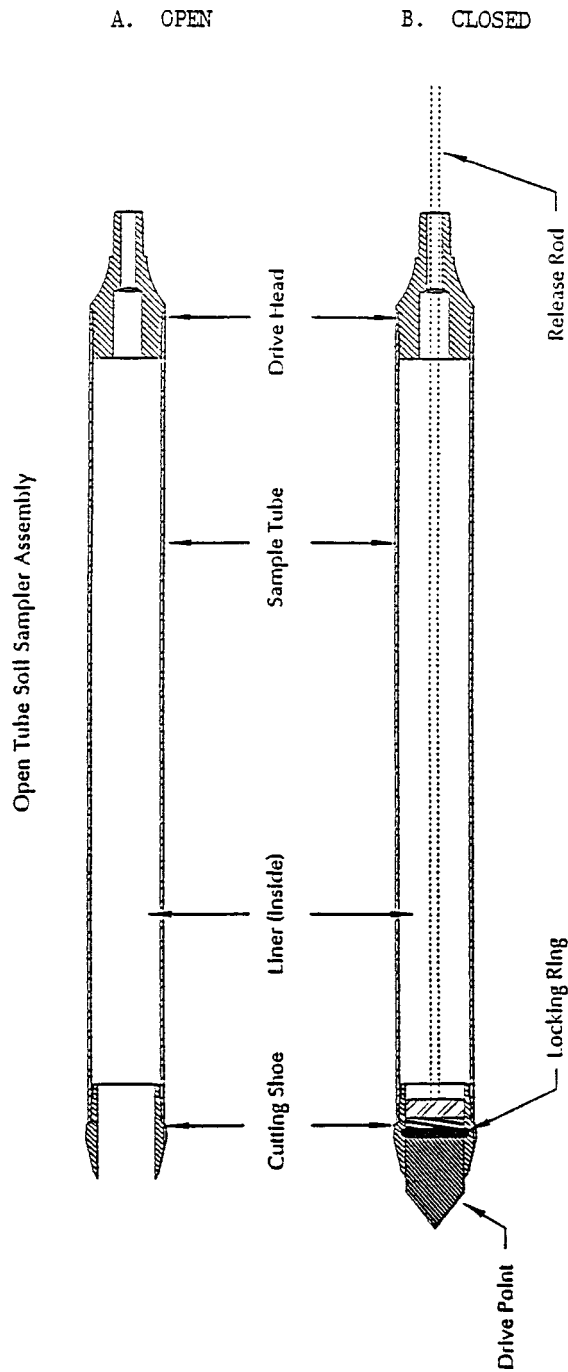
(A) Open and (B) Closed Piston Sampler Assembly, Single Tube System
